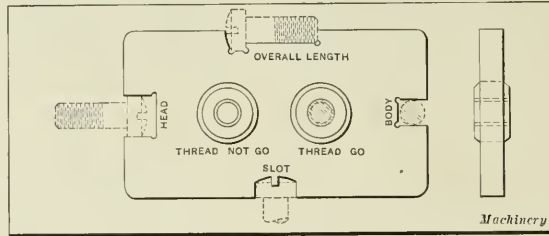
Progressive Type of Tippet Gage for inspecting Filler-head Screws
